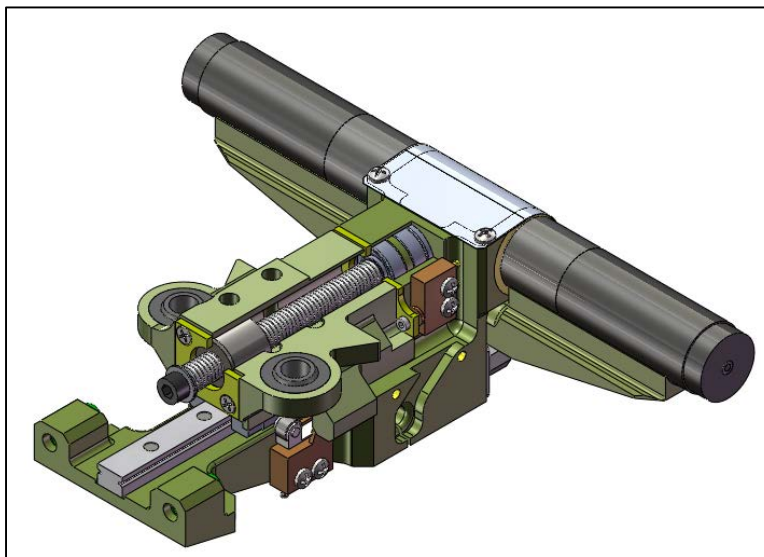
Motor Bracket Assembly in the set-for-flight state
